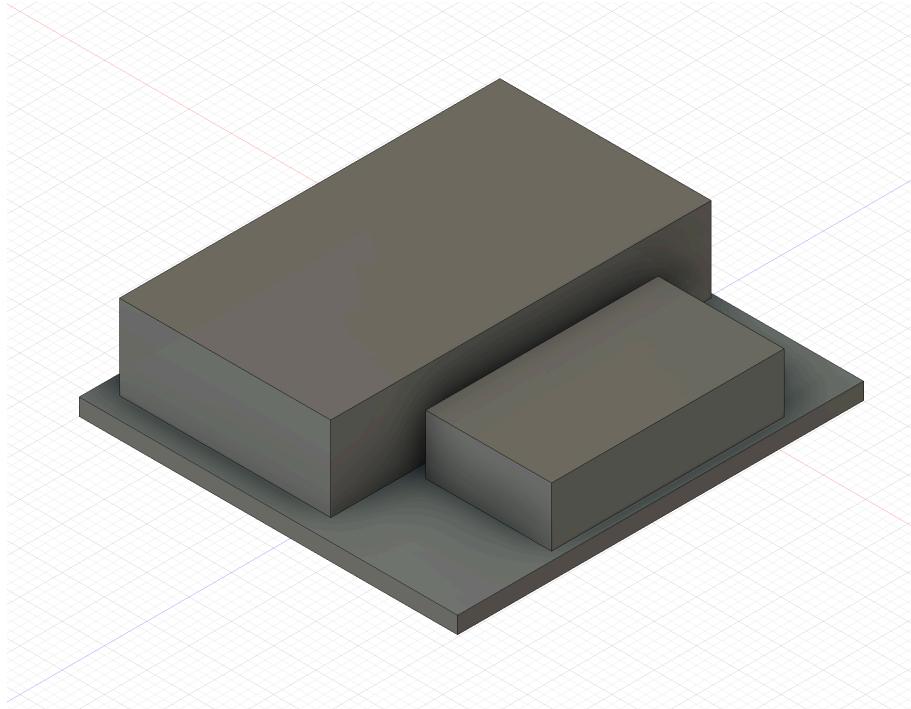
Mounting Plate with Simulated Thicknesses of Electrical Components
